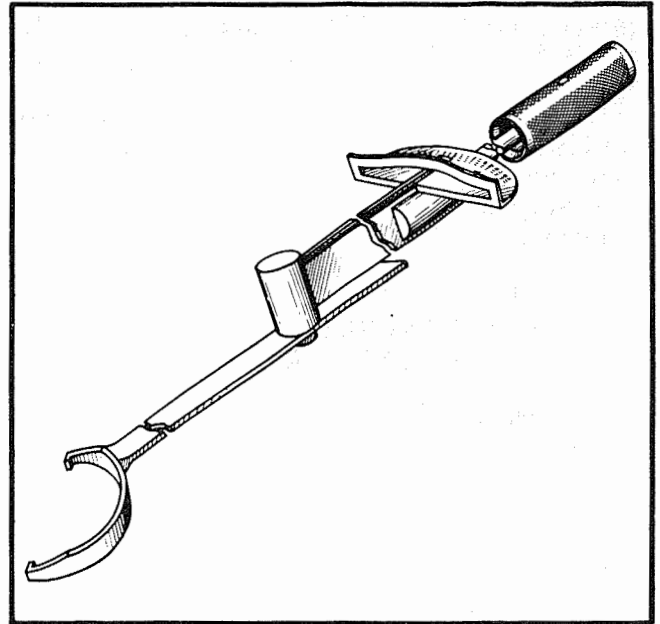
Intake Pipe Connection Nut Wrench with Torque Handle
